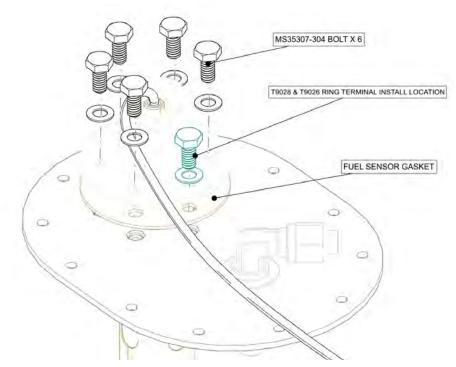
REMOVE FUEL LEVEL SENSOR
